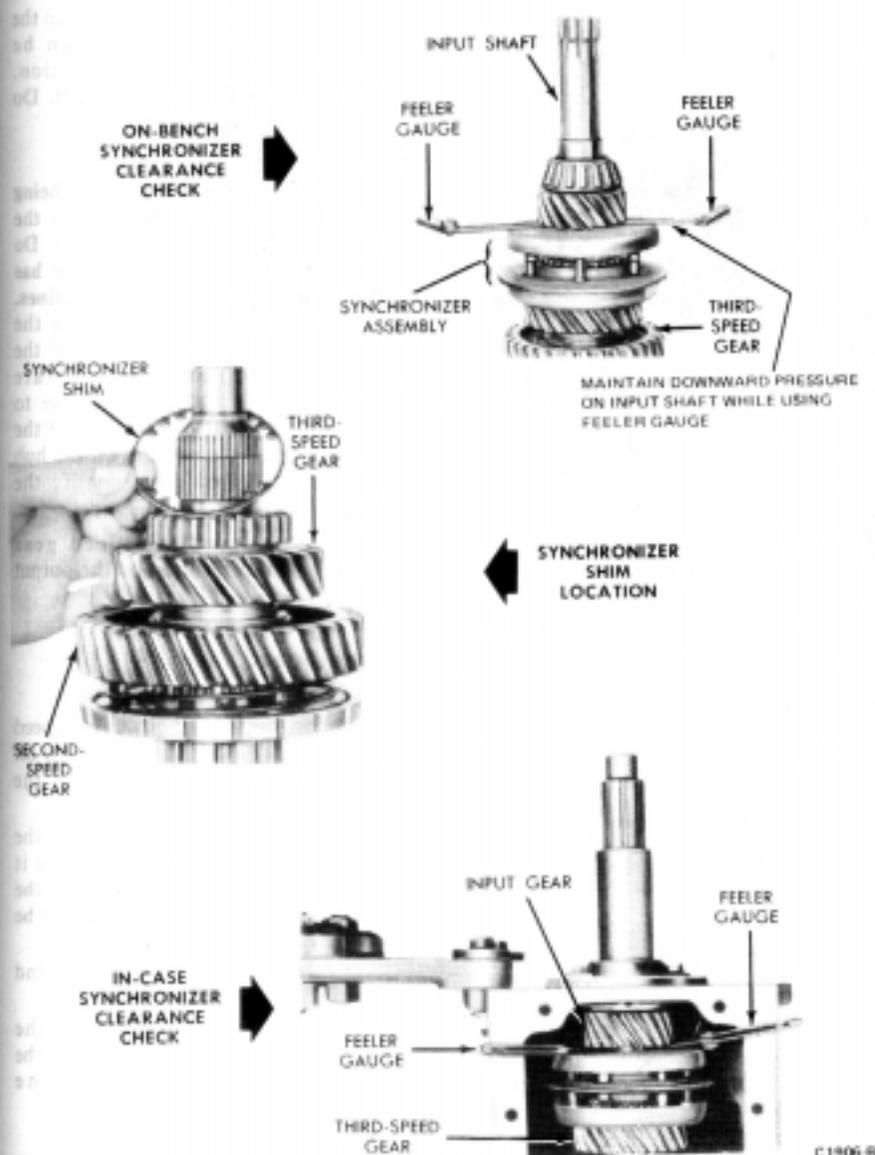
Measuring Input Shaft-To-Synchronizer Clearance
